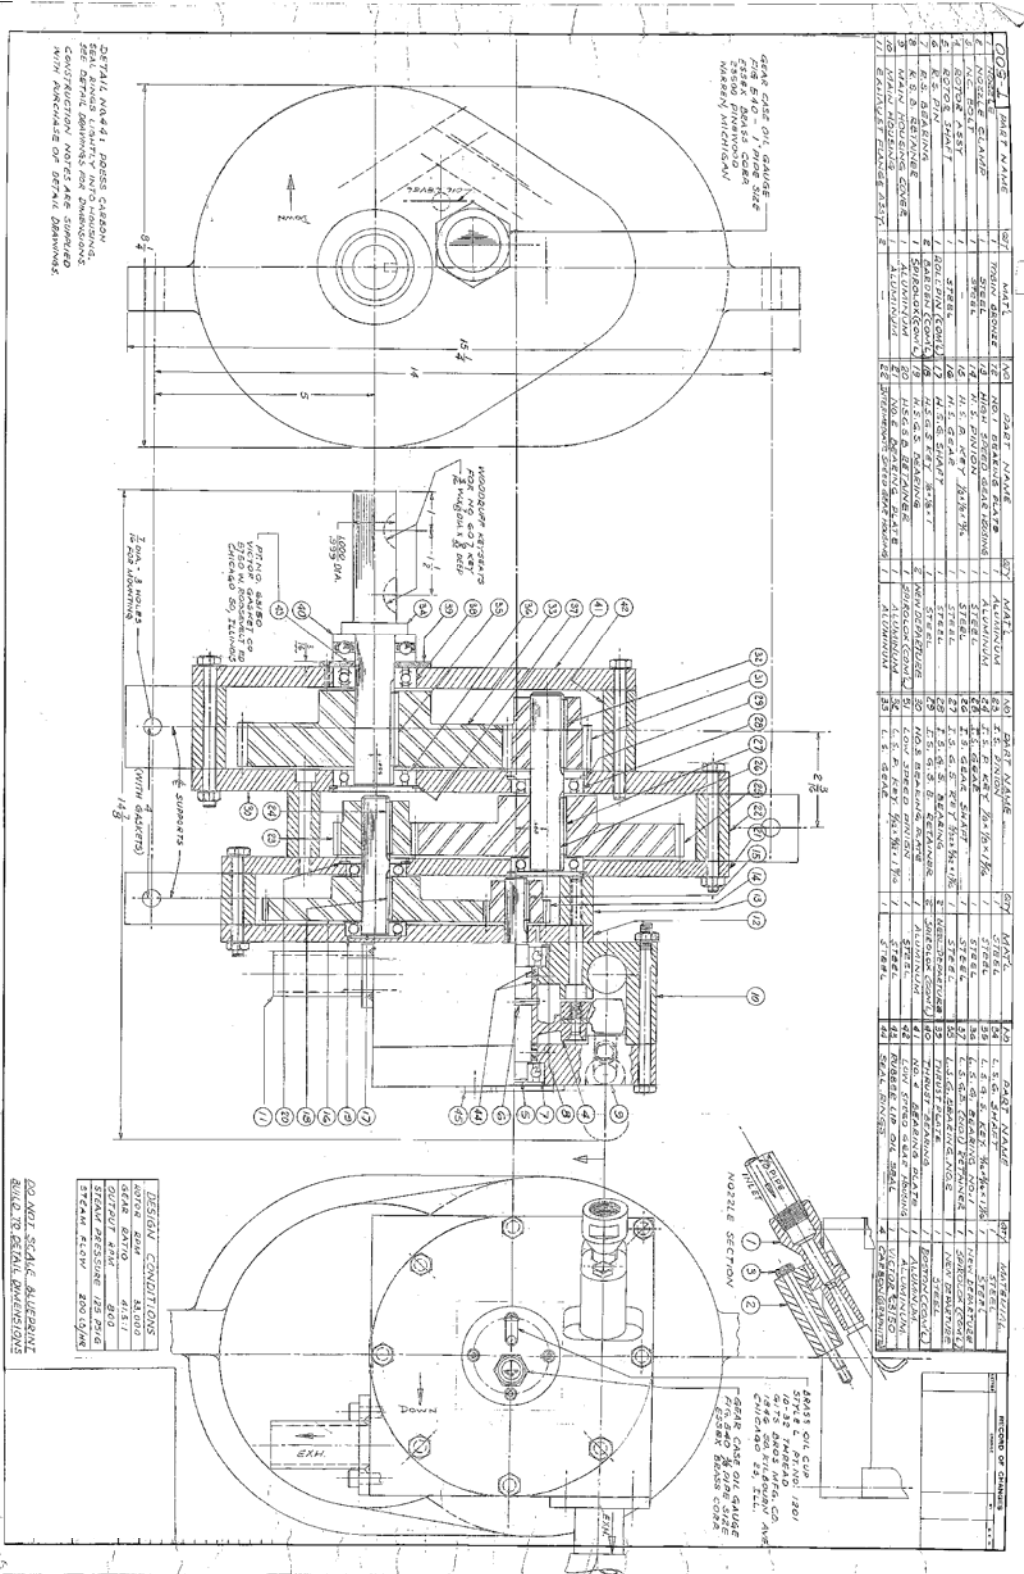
Detailed drawing for complete assembly of T-500 impulse steam turbine and gear train.
